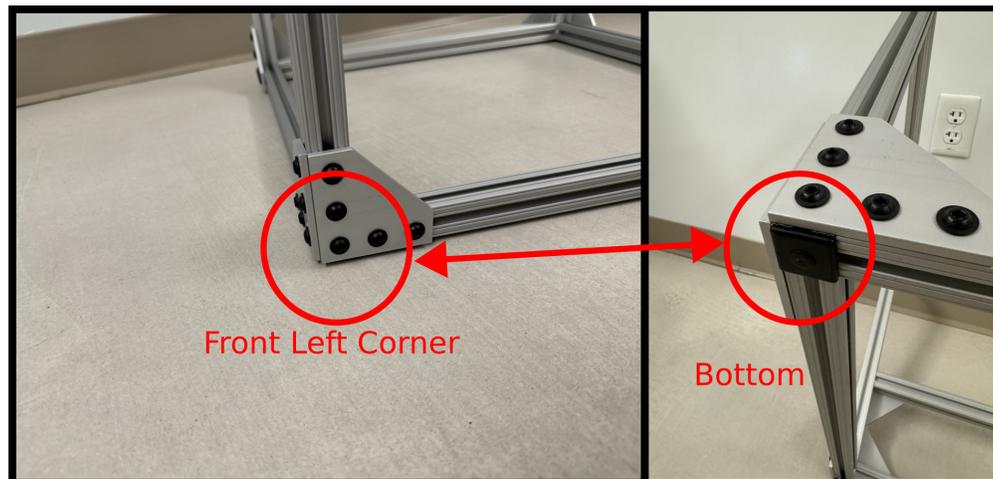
The four end caps should be installed below each of the 4 corners of the frame. Shown here is one such corner.
